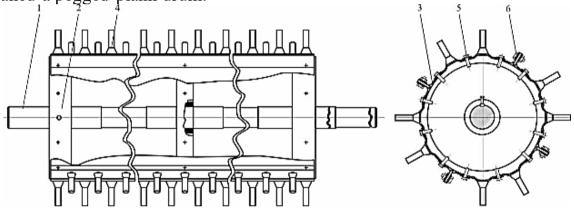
Plank drum with pegs. 1-shaft, 2-disk, 3-shell, 4-peg, 5-bolt, 6 - bolt, nut, washer.
